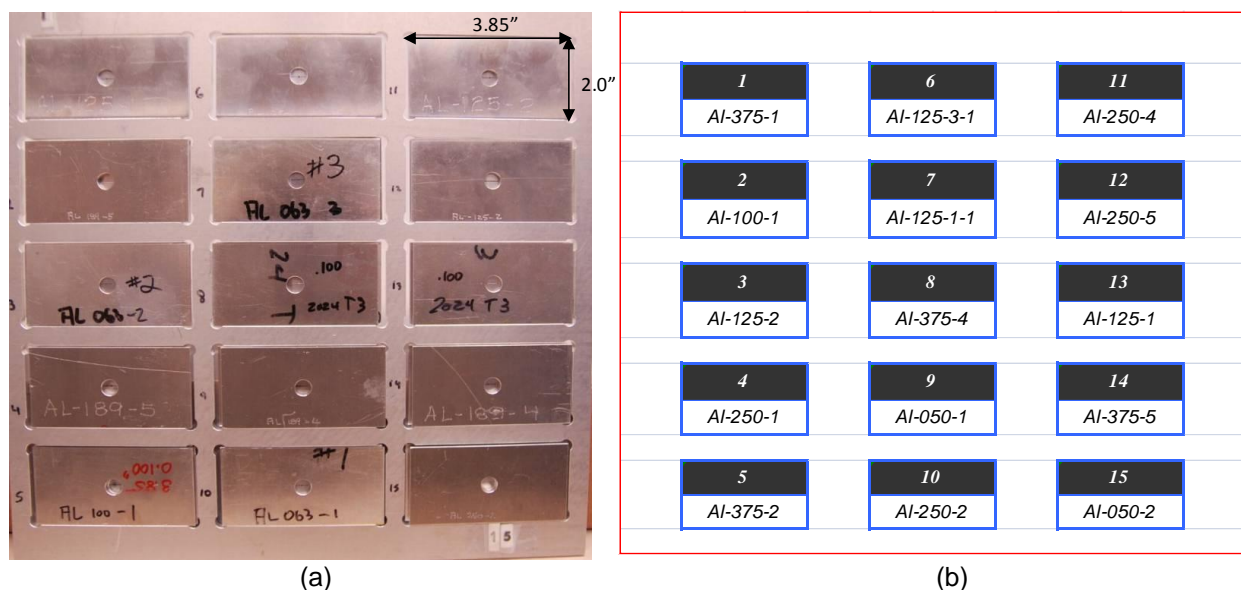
(a) Panel Layup Containing Cracked Specimens for Laboratory Testing, (b) TM2 Panel Layup Record Identifying Specimen Locations Within the Frame
